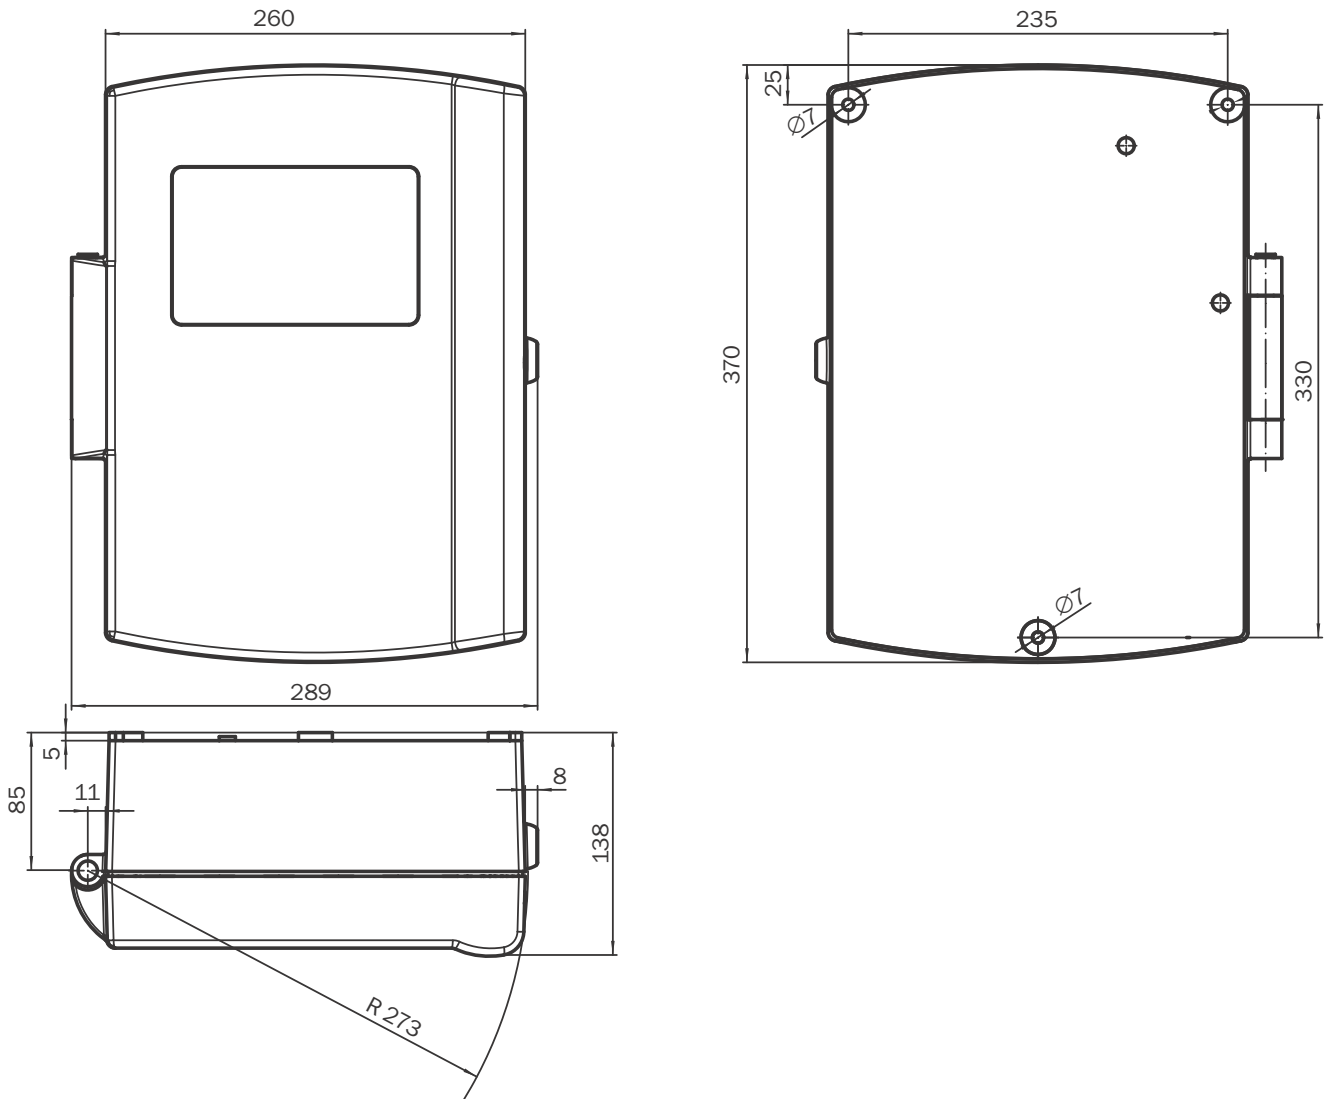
Dimensions of GM35 evaluation unit, cast enclosure version
